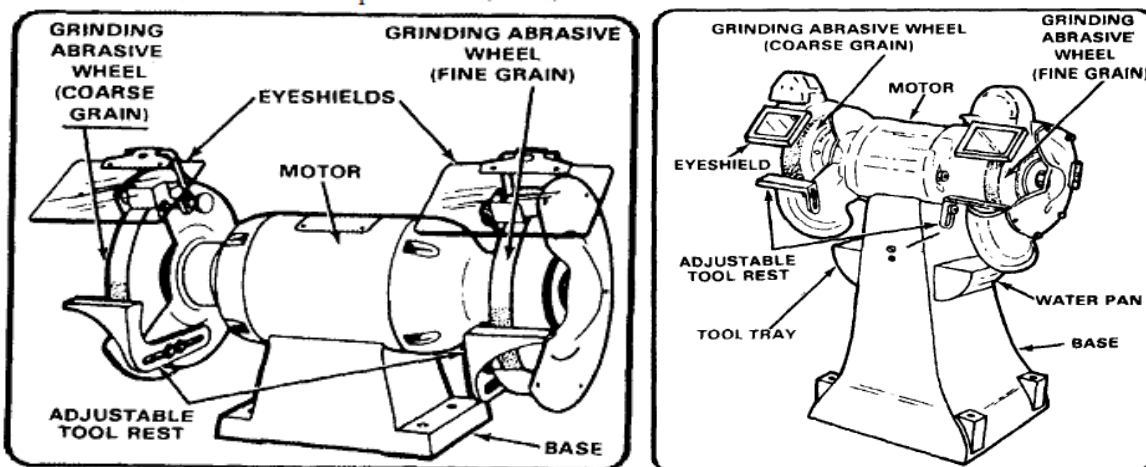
Bench and Pedestal (Floor) mounted utility type grinding machine
